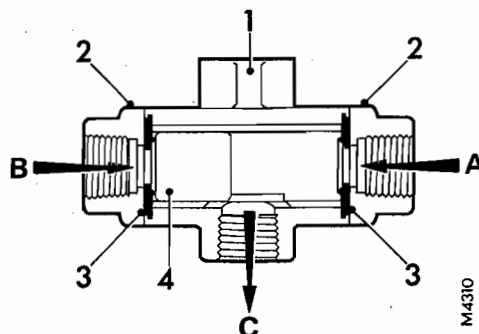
SECTION THROUGH DOUBLE CHECK VALVE
